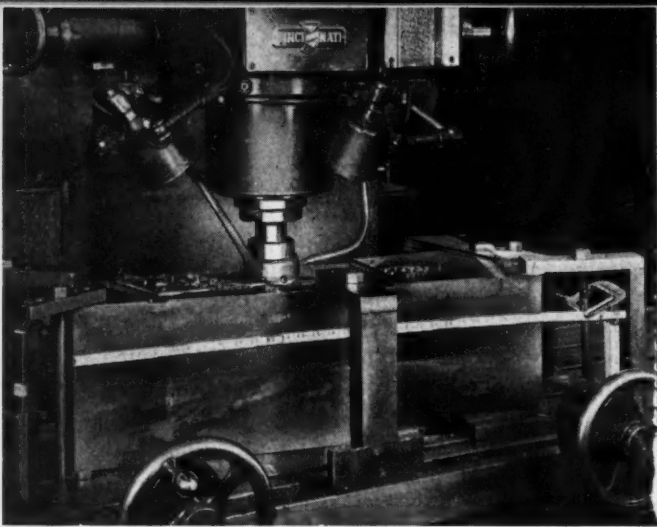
Milling a Trial Aircraft Wing Hinge from a 1400-pound Steel Billet on a Hydro-Tel Milling Machine
